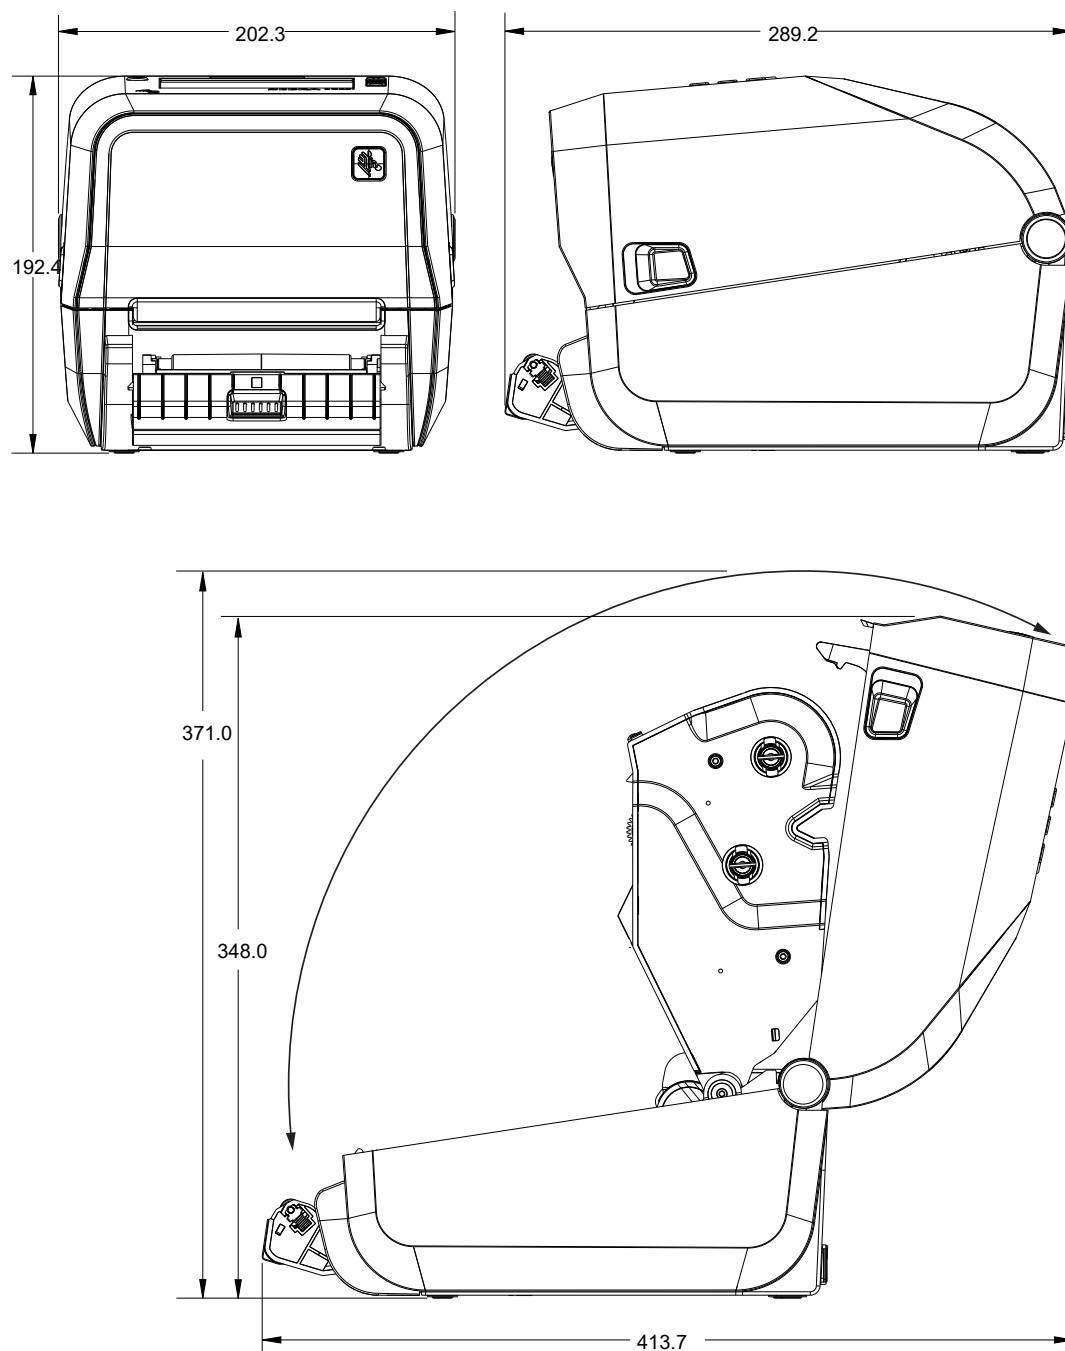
ZD421/ZD621 Thermal Transfer Models – Dimensions for a Standard Printer
